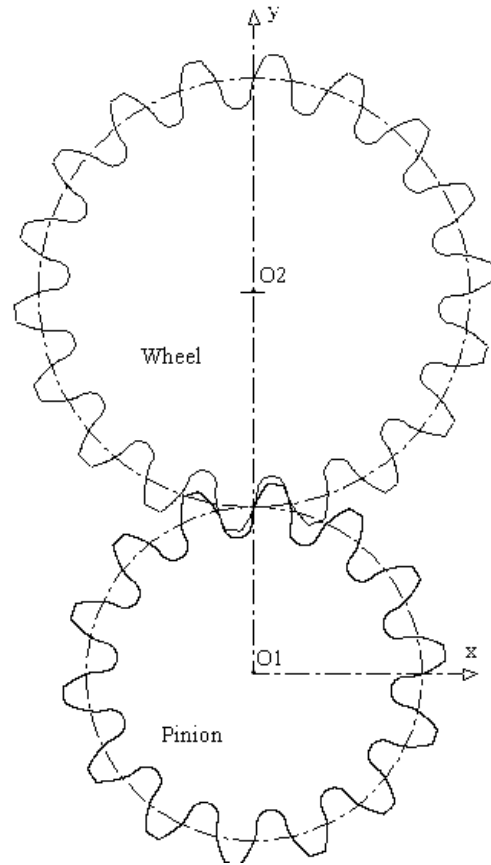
Pinion-wheel pair with circular filleted teeth in mesh
